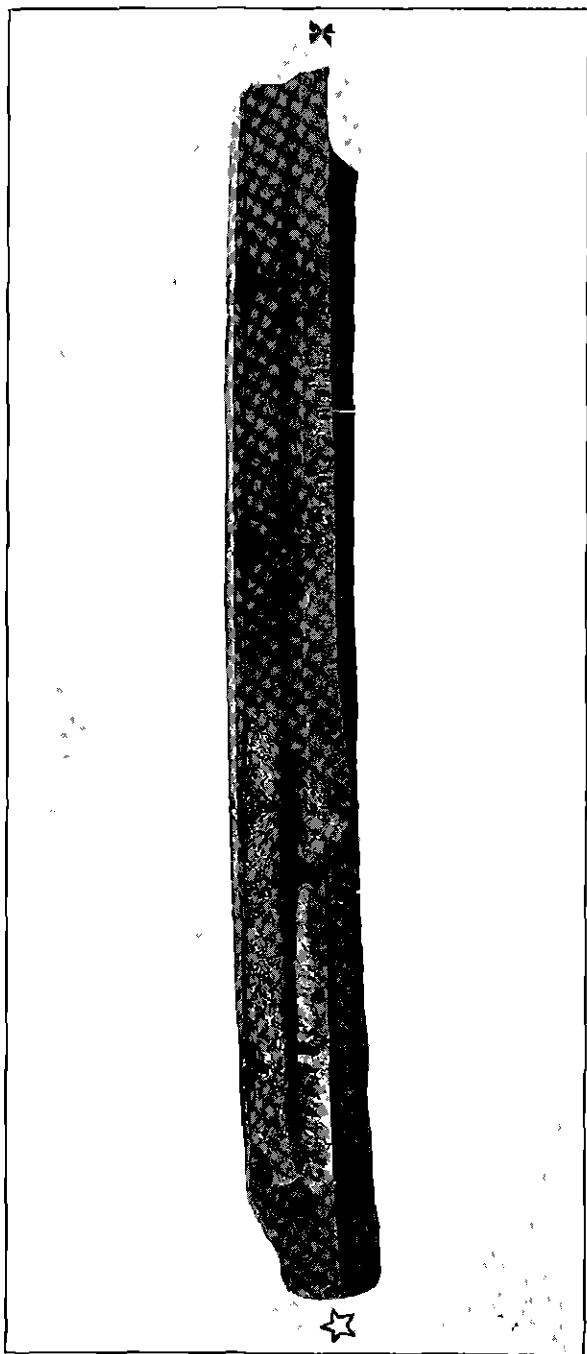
View of under side of fragment from receiving end of rail, showing fractured surface of web. Origin of fracture at star on cut.
